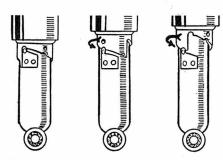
Rear suspension units are adjustable. Left view shows soft, center is medium and right is firm positions.
